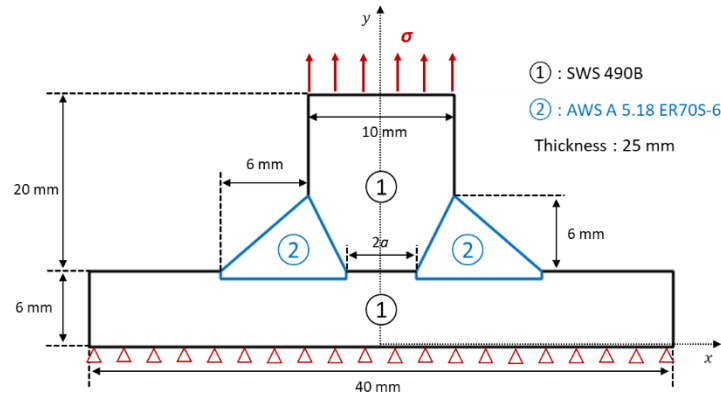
Geometry of a fillet welded joint under uniaxial cyclic loading
